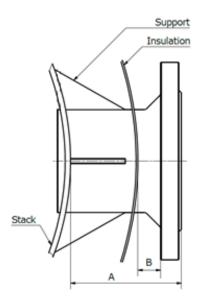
Welding Neck Dimensions for the Flange
